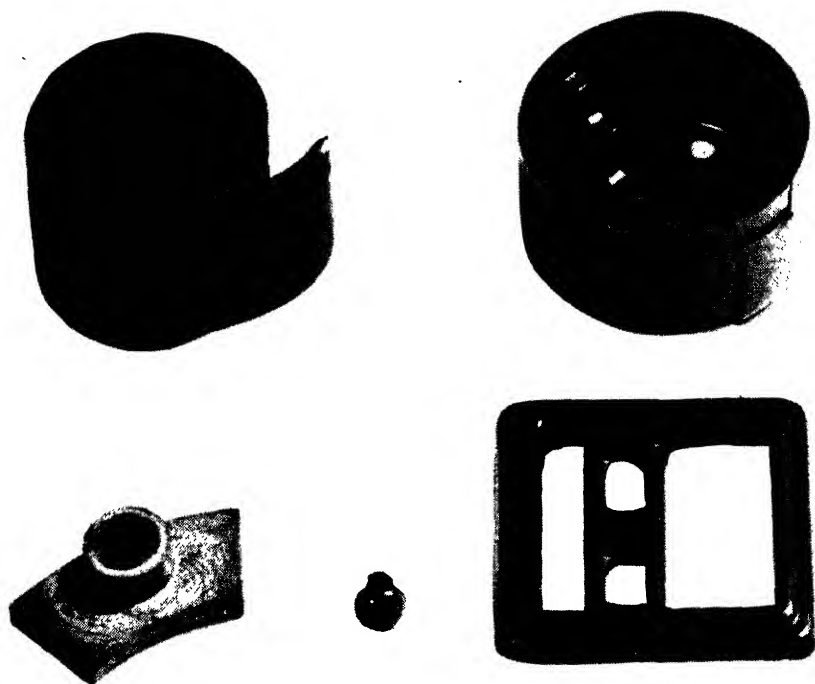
Compression-molded thermosetting parts, in this case using impregnated creped paper and fabric coils as preforms. (Courtesy Cincinnati Industries, Inc.)
